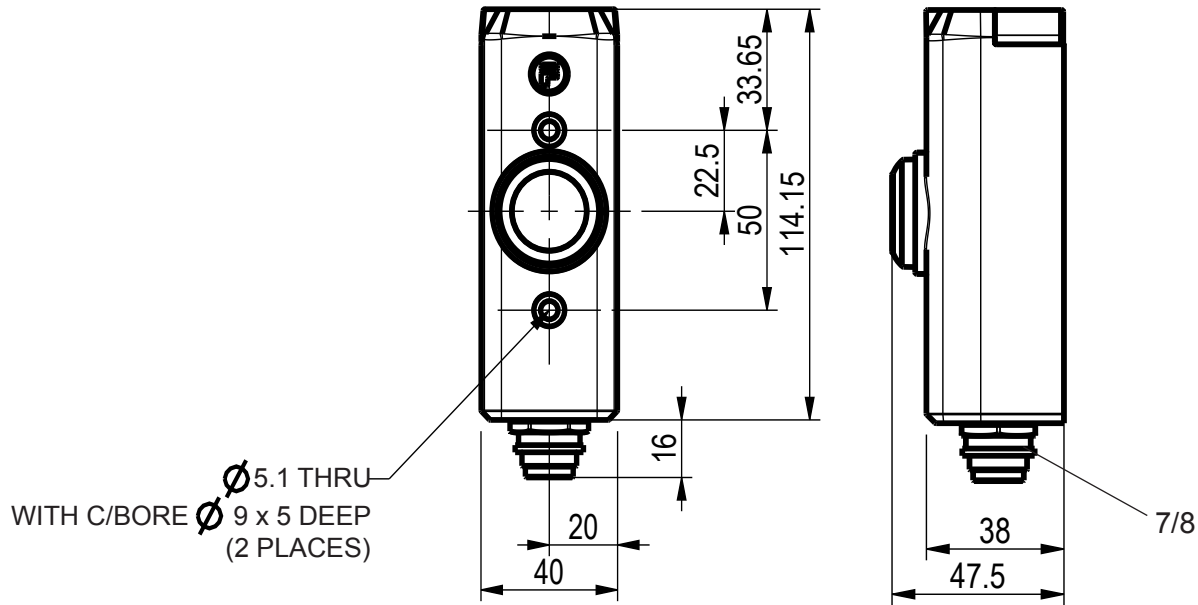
Dimensional Drawing - TQ4, TQ5, TQ8 & TQ9
